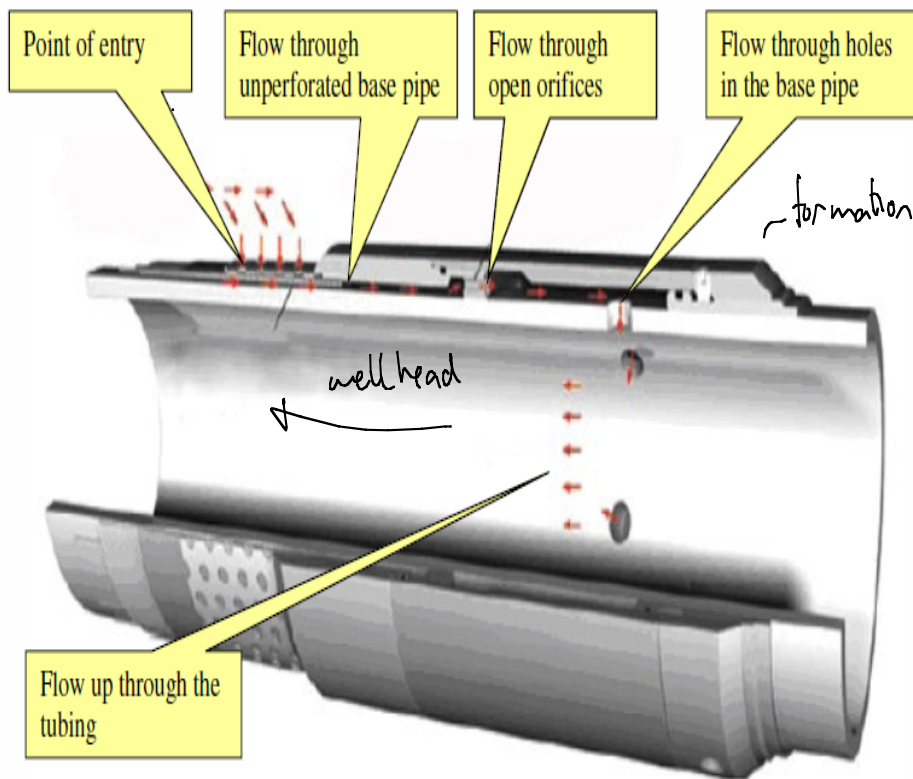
Helical channel type, Equalizer™, Baker Oil Tools [22]
